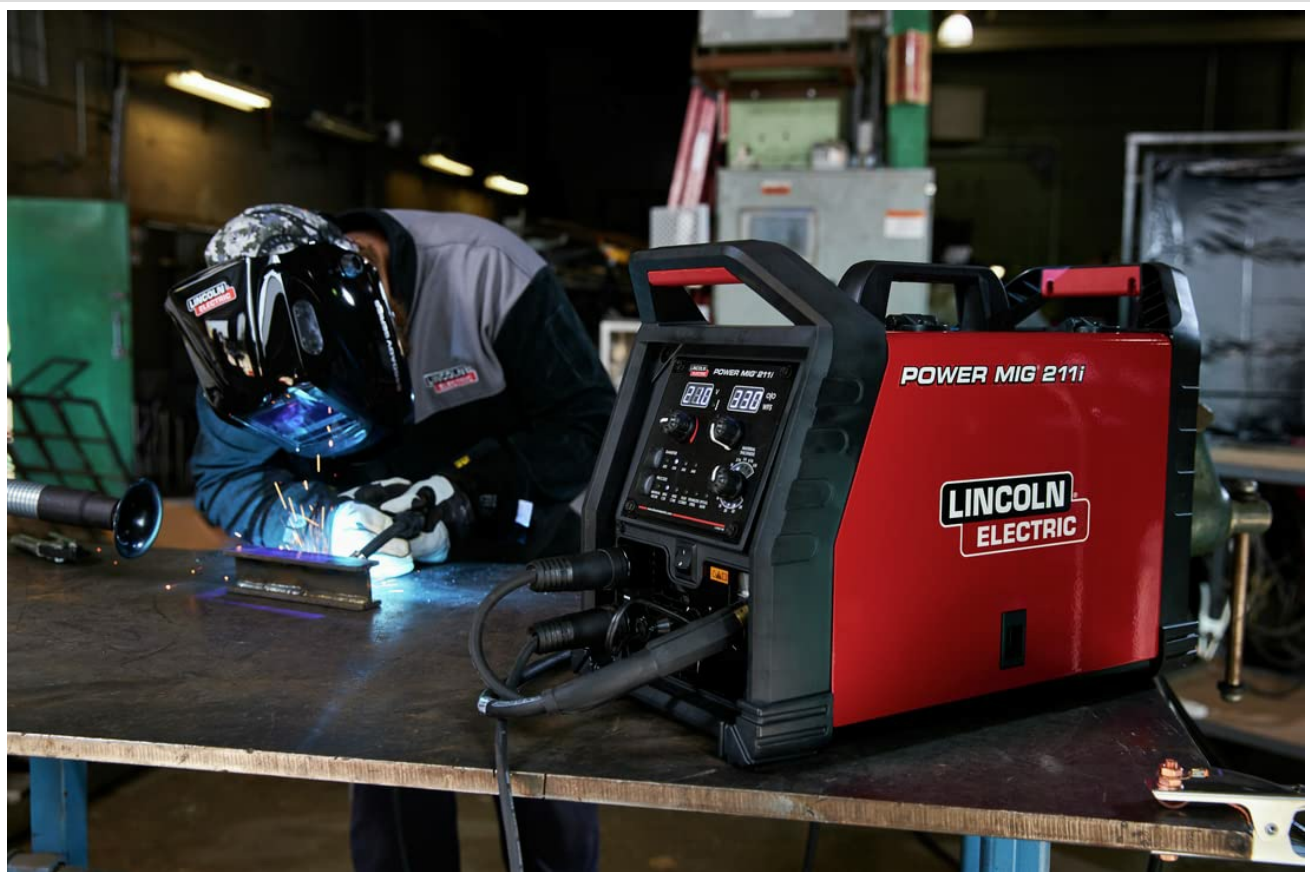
Welding operation with the Power MIG 211i.
